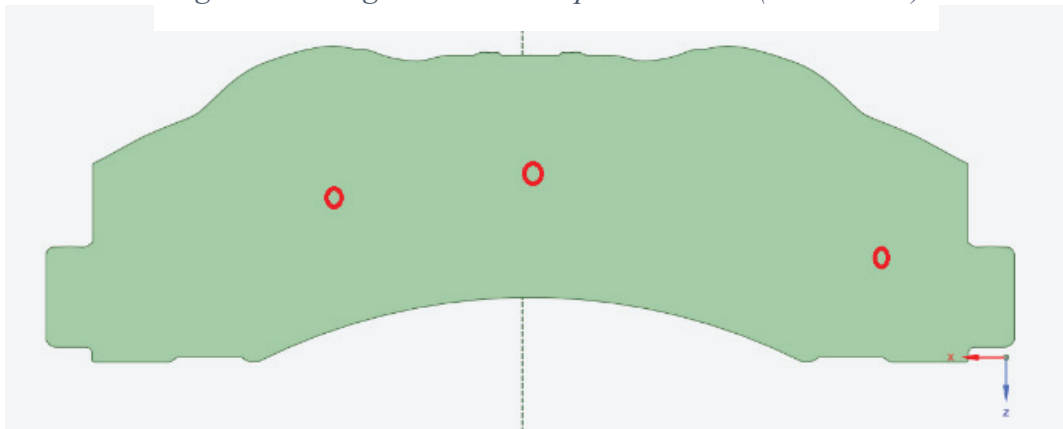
Wagner Thermocouple Locations (Rear View)
